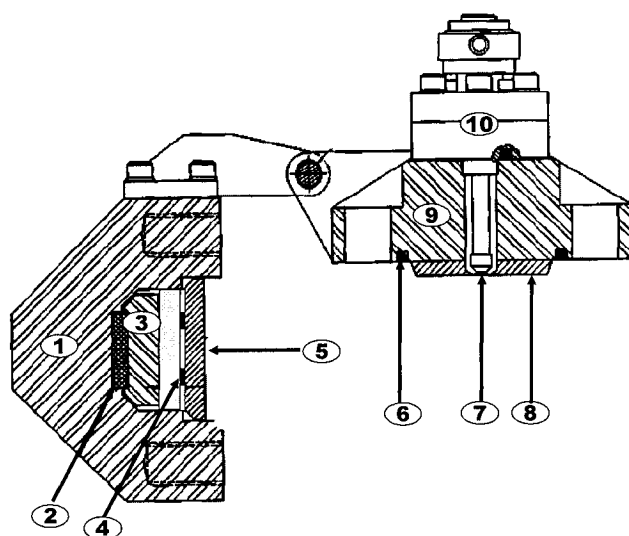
Top view of the HPSPR [38]: 1. main body of pressure vessel; 2. bearing plate; 3. moving plate carriage; 4. spacers; 5. moving plate; 6. O-ring; 7. SST active face head; 8. fixed plate; 9. cover plate of pressure vessel; and 10. SST.
